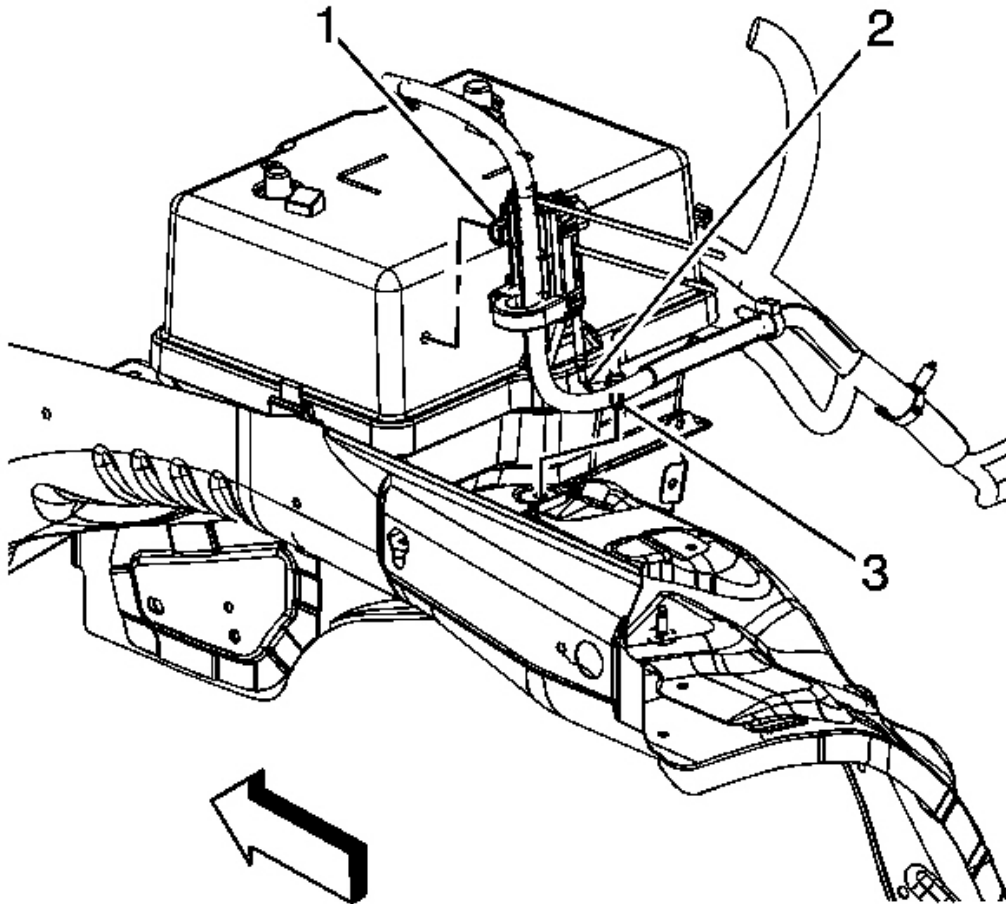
Locating Negative Battery Cable Ground Bolt & Control Module Clip
